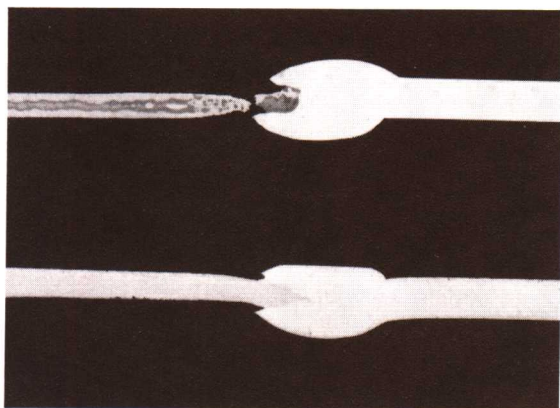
Galvanic couple including carbon steel (left) welded to stainless steel and exposed to seawater. Photograph taken from cut edge.
